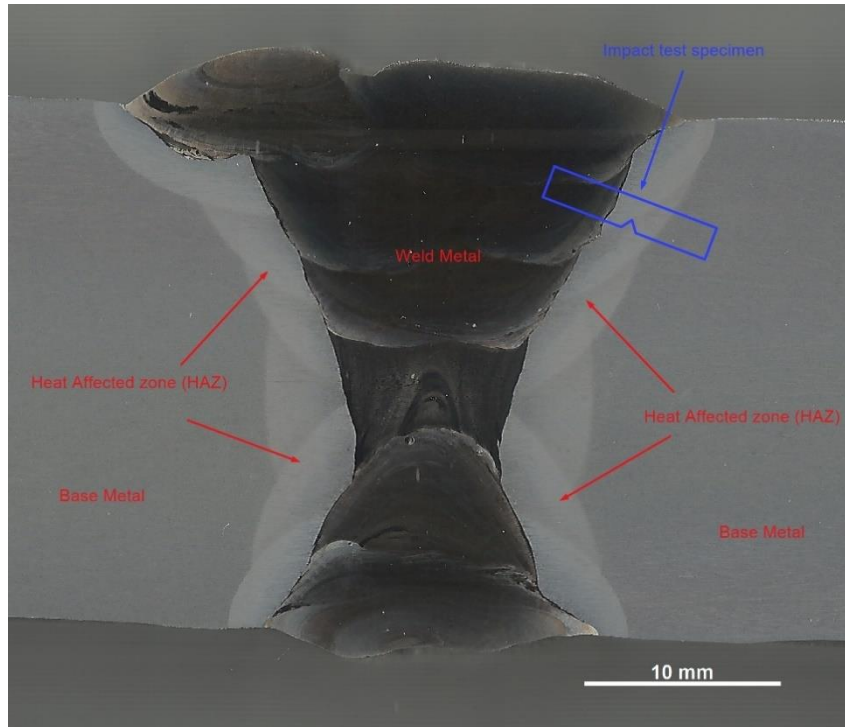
Macrograph of a weld joint showing the different regions a possible location of an impact specimen to test the HAZ.
